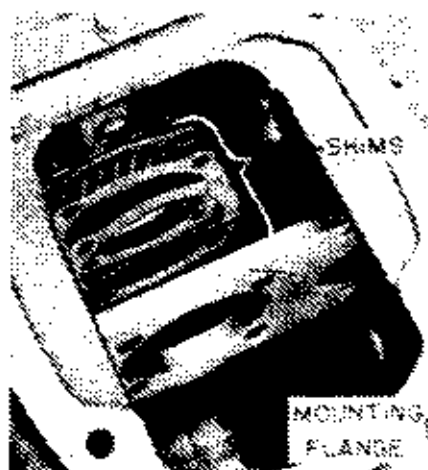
View showing mounting flange exploded from front wall of tractor transmission. Notice the shims between flange and transmission which control pre-load of Sherman transmission output shaft bearings.
